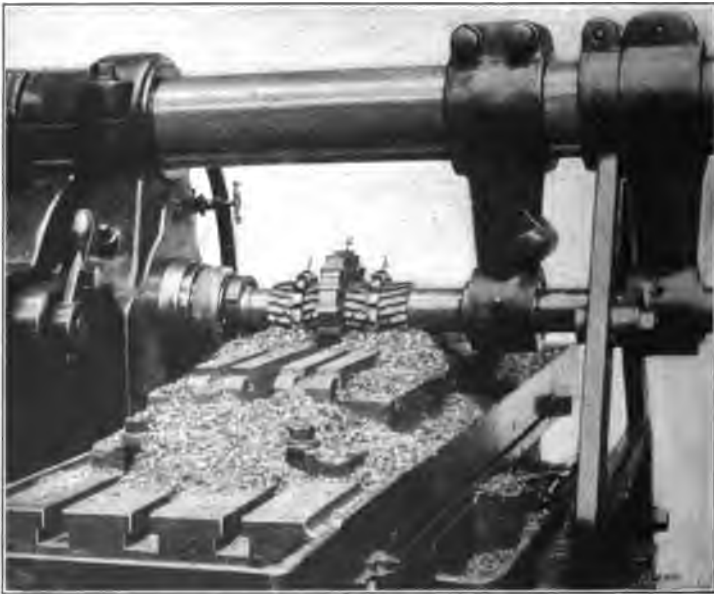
Milling Top and Sides of Casting with Gang Mill
